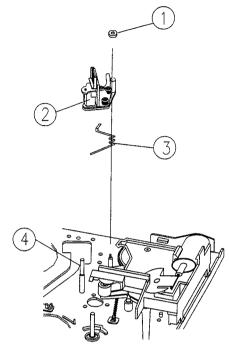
DISASSEMBLY OF THE AC HEAD ASS'Y
